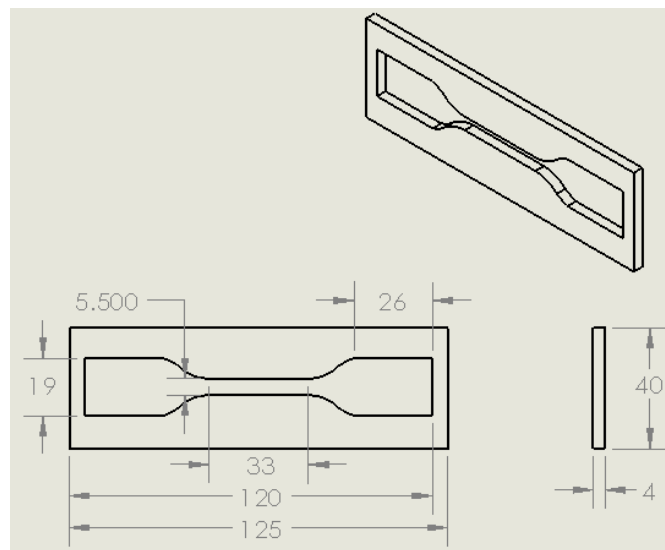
PDMS tensile test mold (dimensions are in millimeters)
